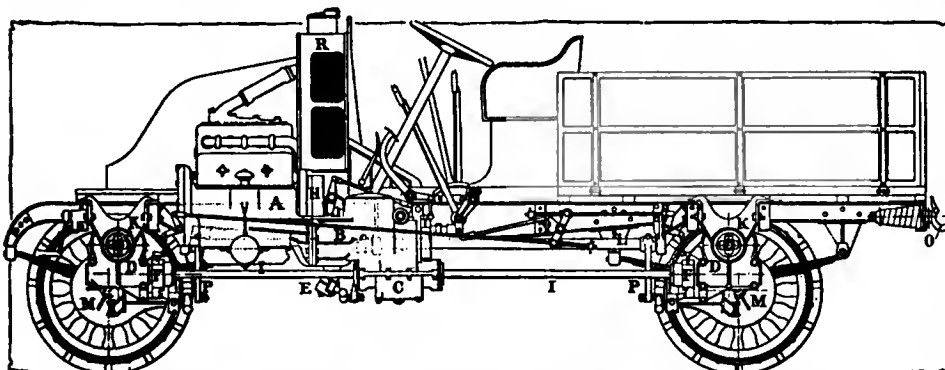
The Latil tractor-truck with four-wheel driving and steering
